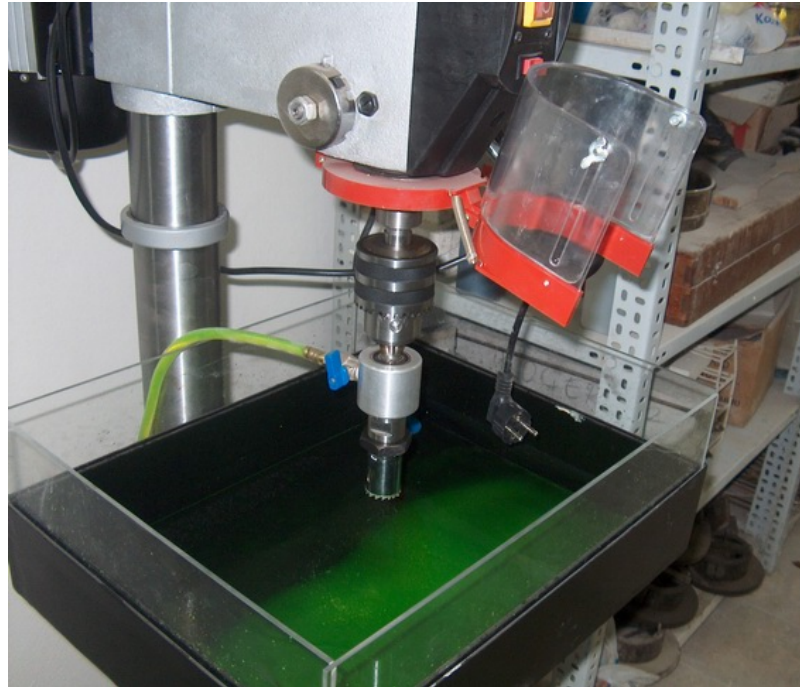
Core drilling machine used to prepare circular specimens from MDF sheets
